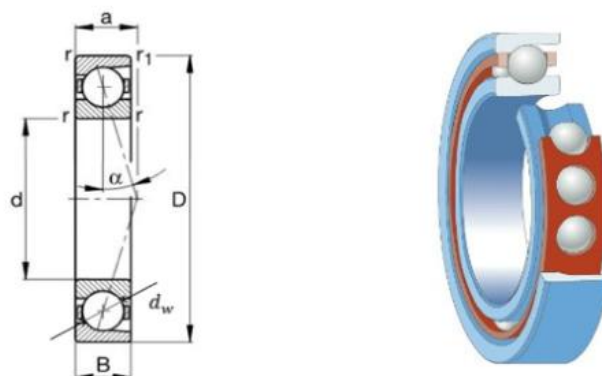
Main parameters cross-section of a single - direction radial ball bearing with angular contact [5]
